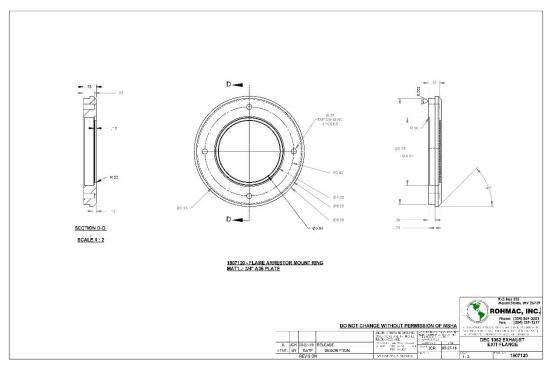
Revised Diesel Power Package Exhaust Exit Flange Drawing
